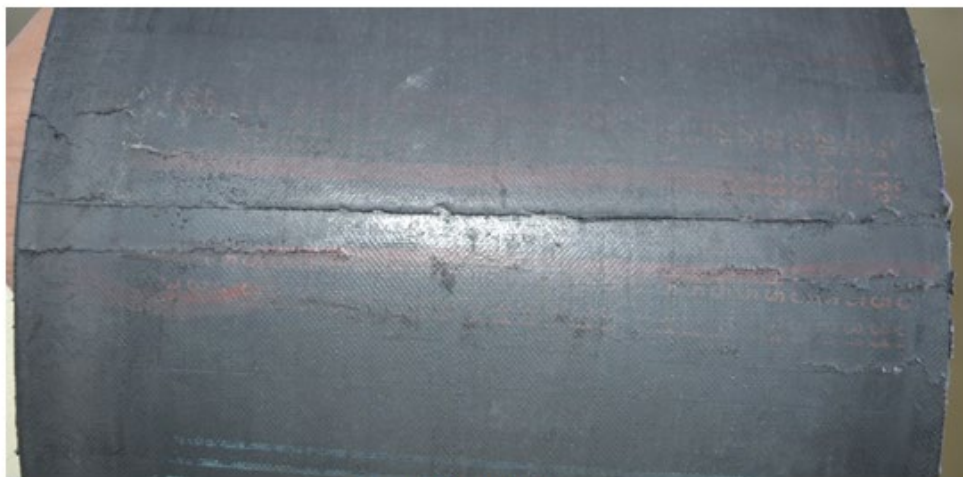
Drive Belt Visual Inspection – Ribs
